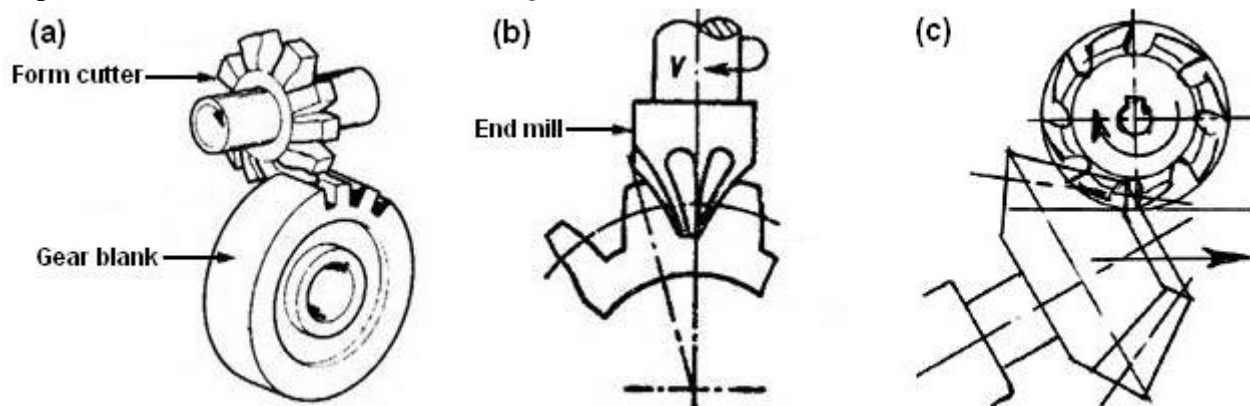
(a) Cutting teeth of spur gear by disc type cutter (b) Cutting teeth of spur gear by end mill
